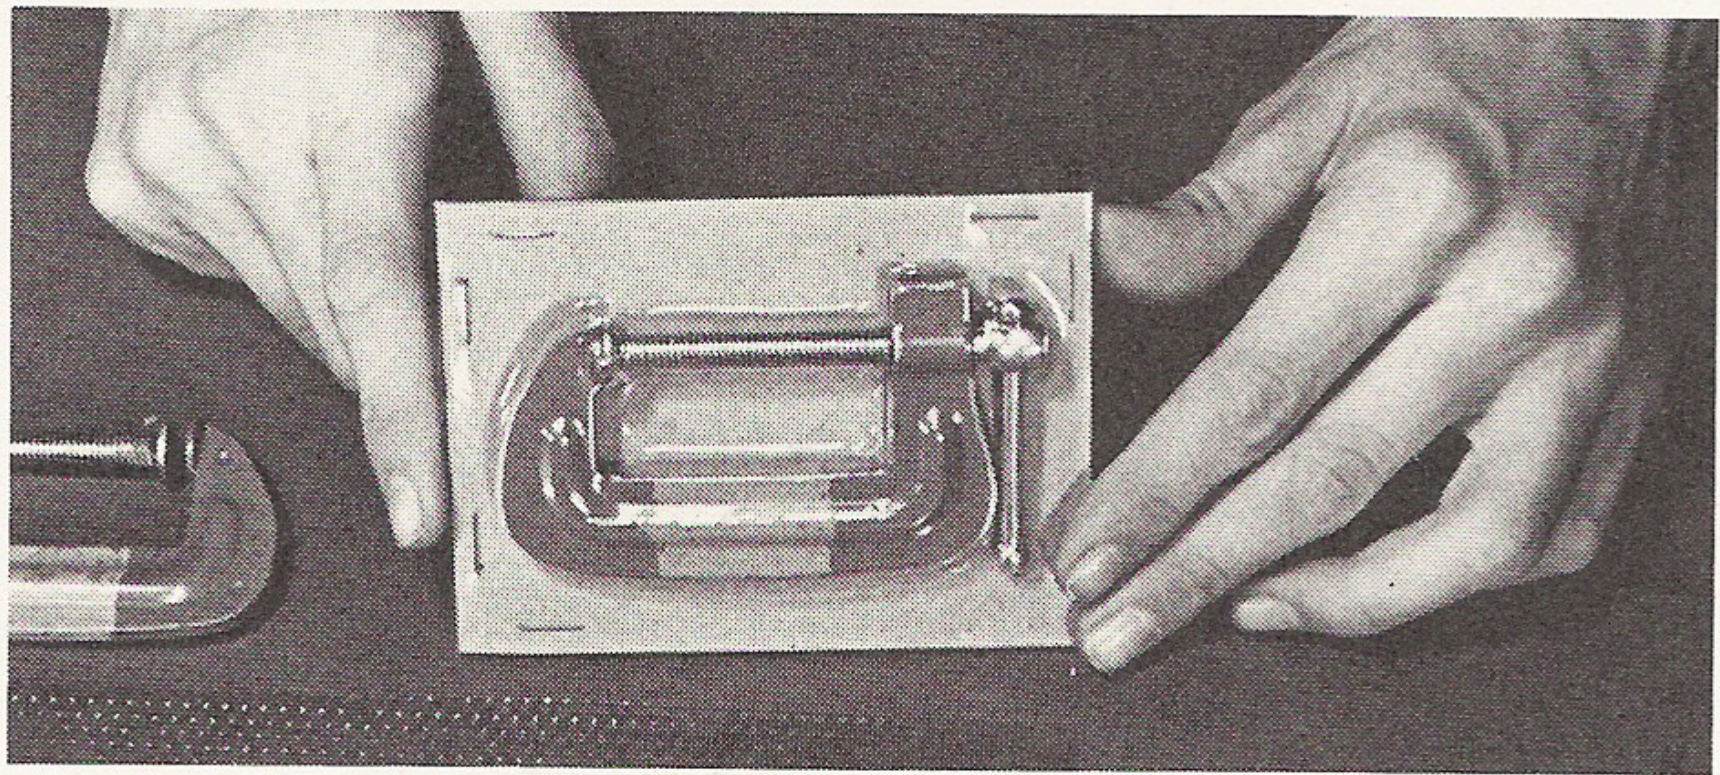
The skin formed sheet is trimmed and fastened to a cardboard backing similar to industrial processes.
